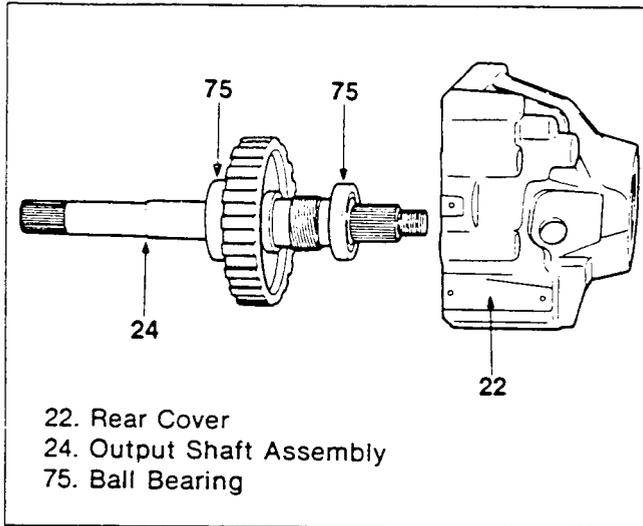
Rear cover and Output Shaft Assembly Removal (1)
